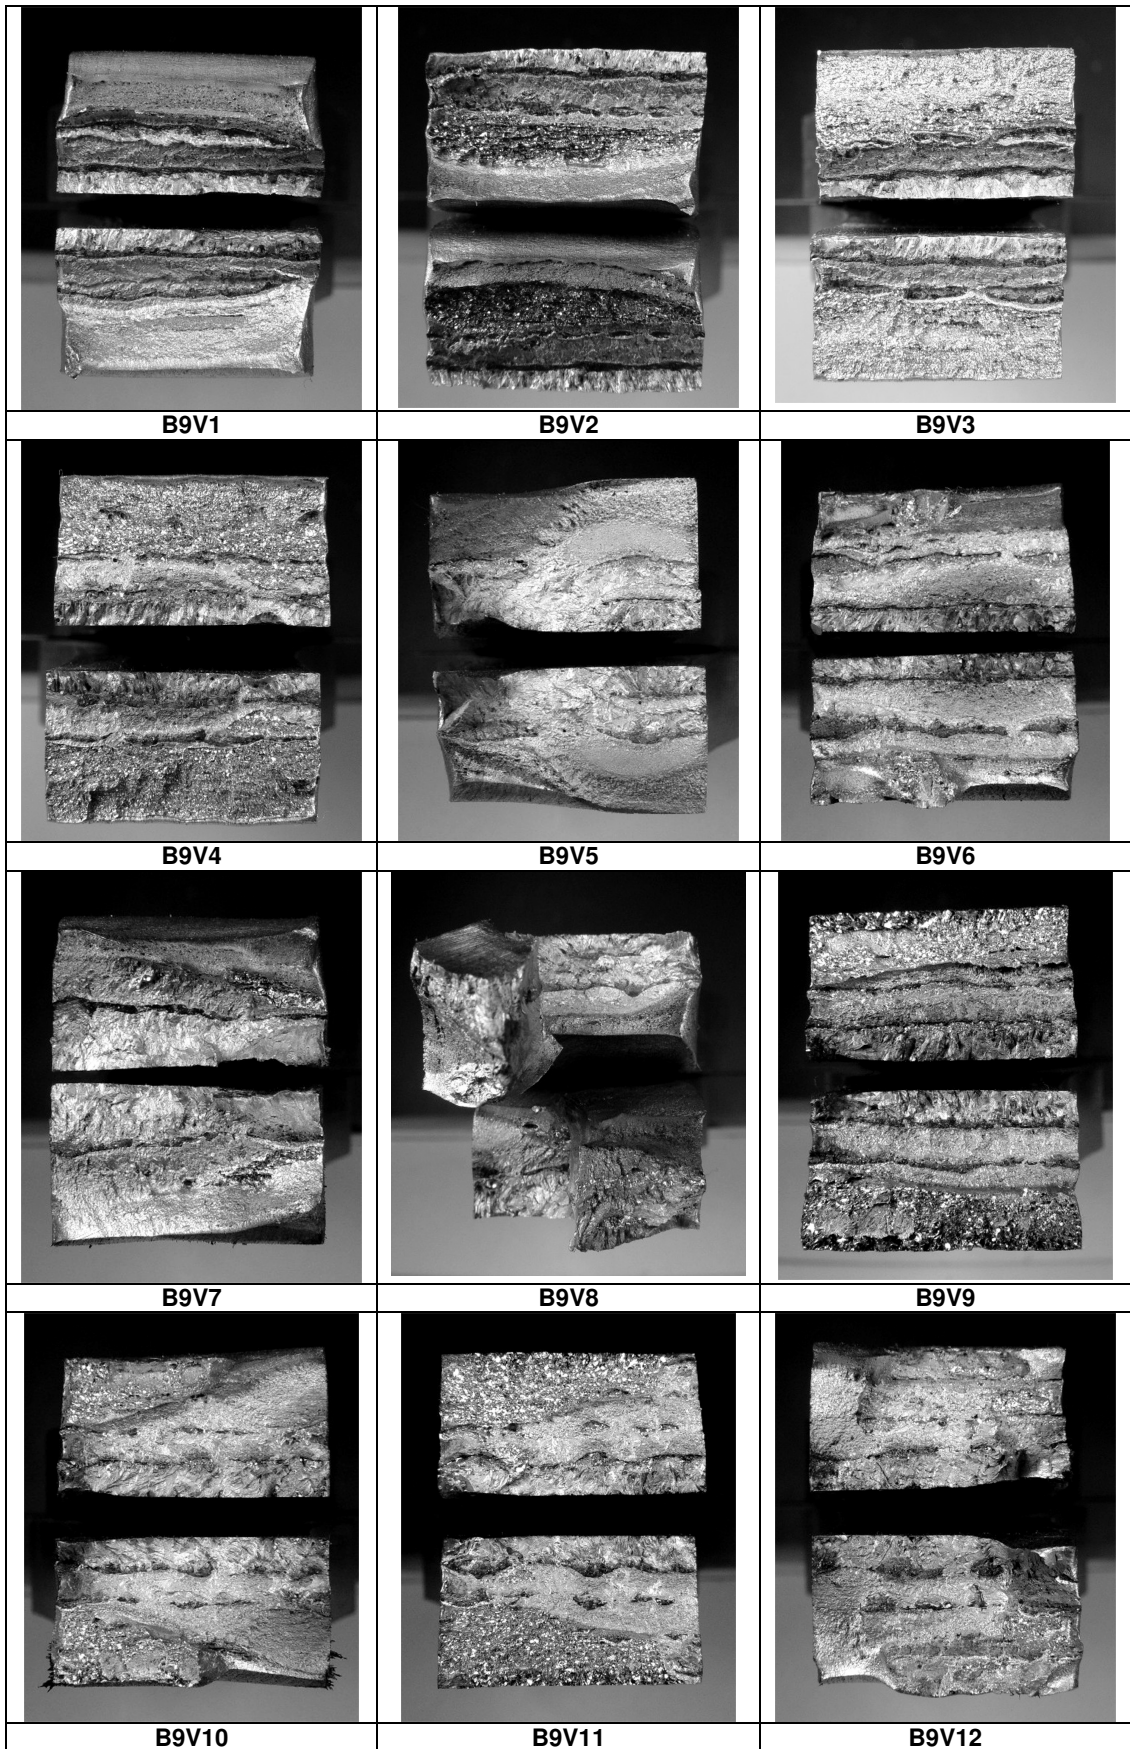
Fatigue fractographs of samples from 12 mm thick GMAW weld (B9).
